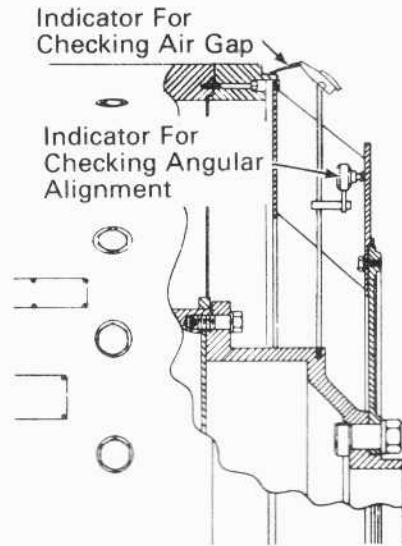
Dial Indicator Alignment Tolerances
